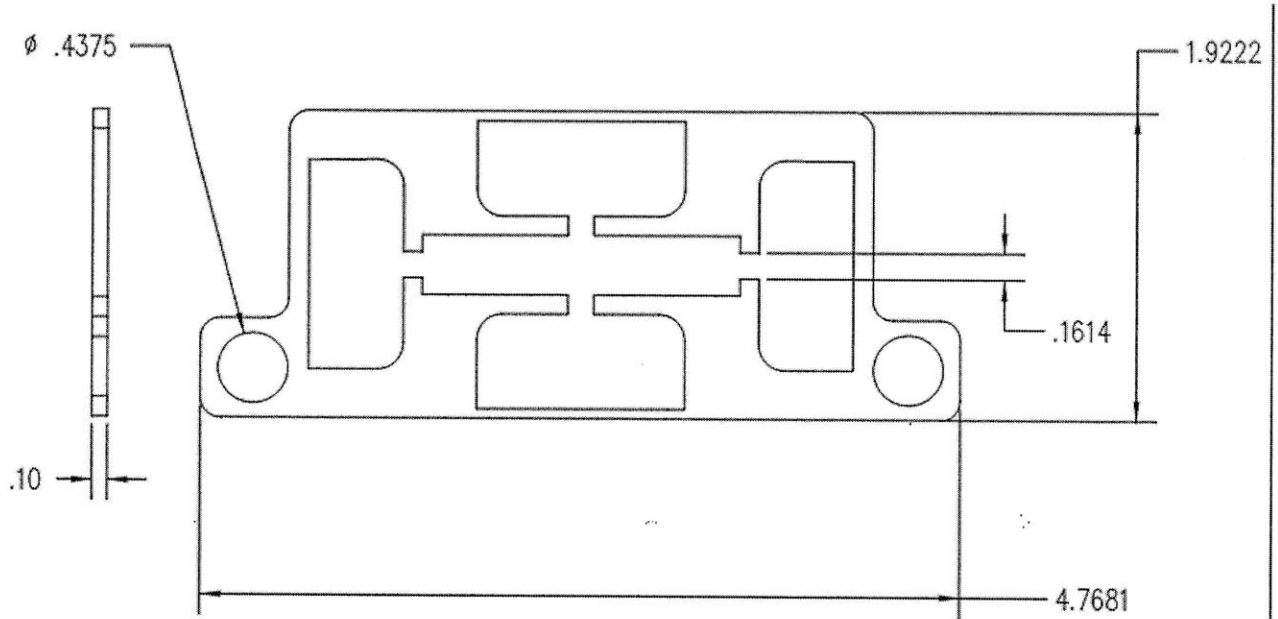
Dimensioned drawing of rectangular mandrill used in actuator sub-unit
